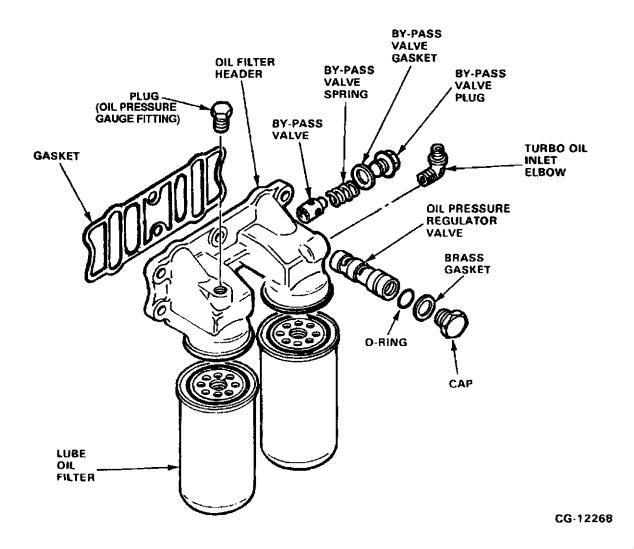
Oil Filter Header, Filters, Bypass Valve and Pressure Regulating Valve
